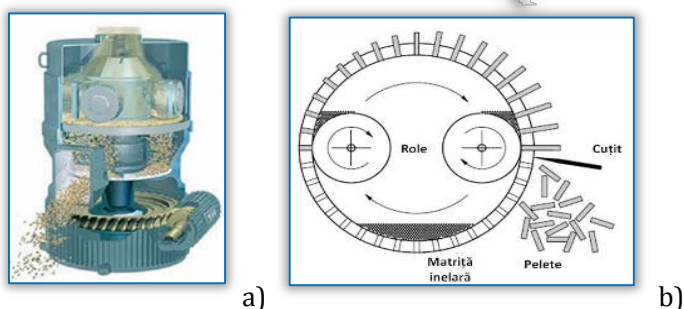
Operating principle of pellet mills (a – flat die; b – ring die) [2]
